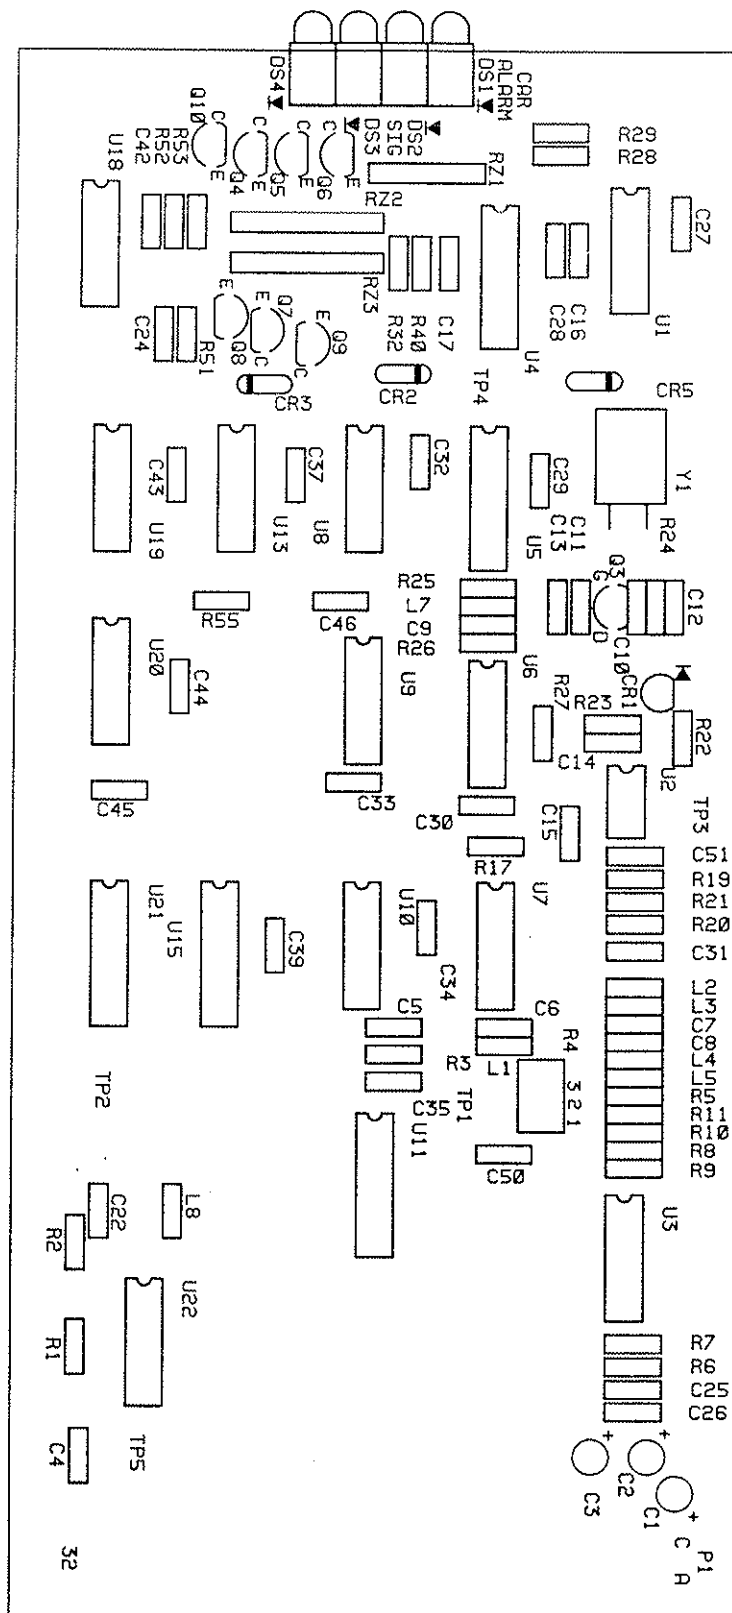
Component locator drawing, RFL 97 FO INRX Single-Output Fiber Optic Receiver Module
